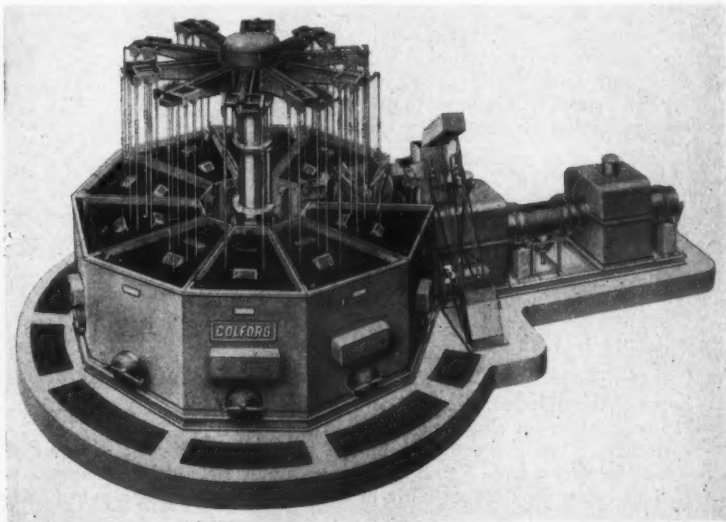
This machine provides for de-burring and chamfering slugs at one end, to facilitate loading into a forging die
